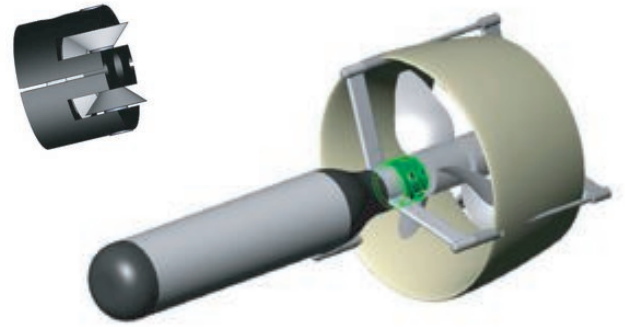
CAD model of DCRP-2006 with contrarotating miter gearbox (enlarged at left) highlighted in green. The contrarotating miter gearbox is run wet to simplify sealing, assembly, and maintenance.
